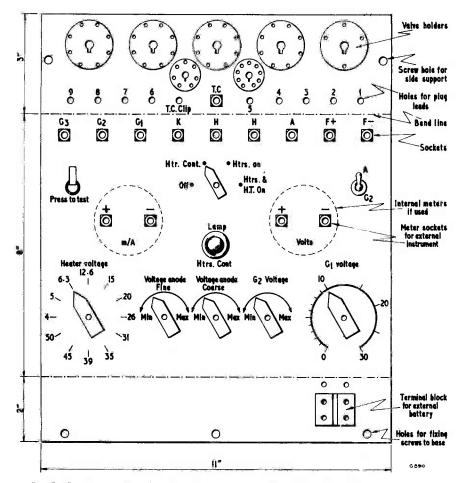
Front view of panel and markings before bending. Material is 18 s.w.g. aluminium
